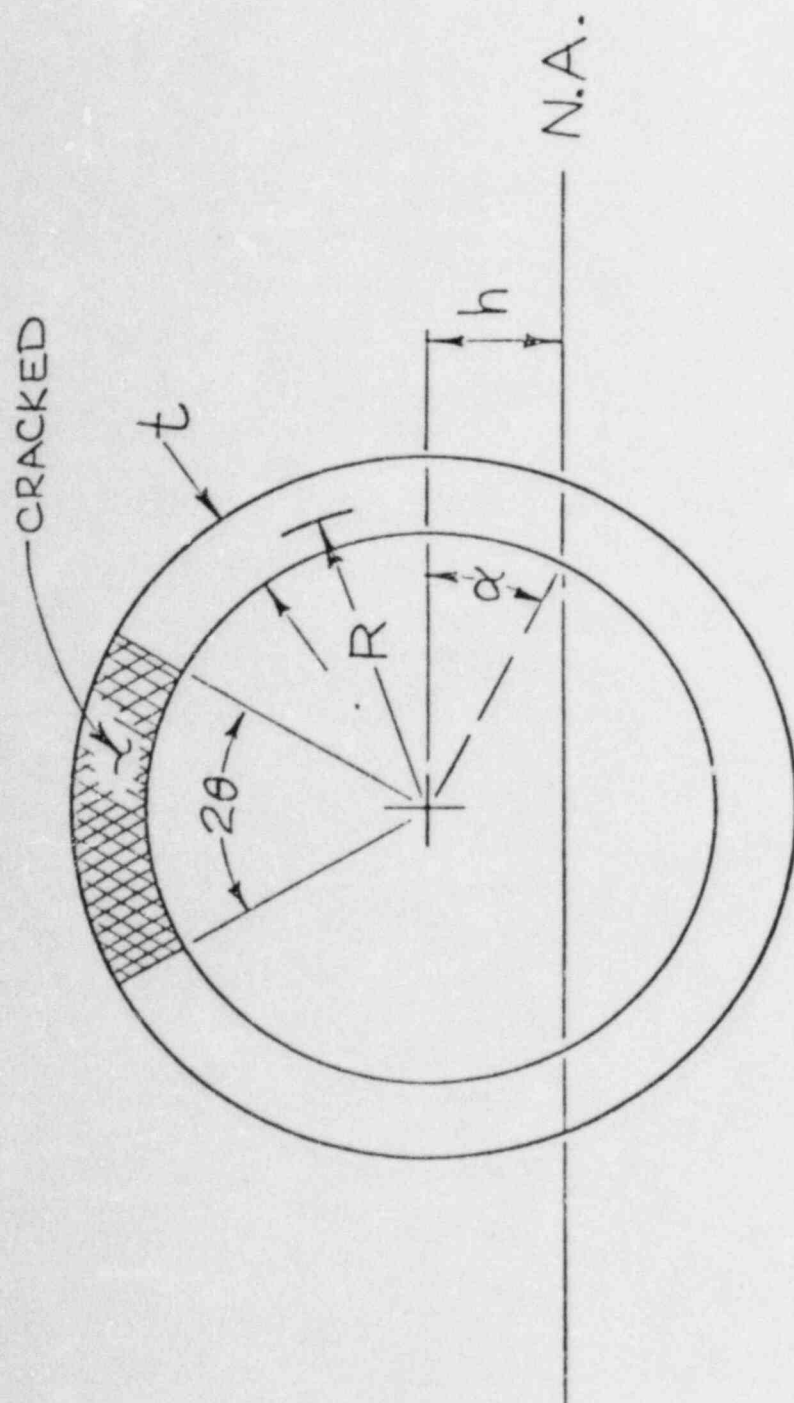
Geometry of Cracked Cross-section of a Pipe
